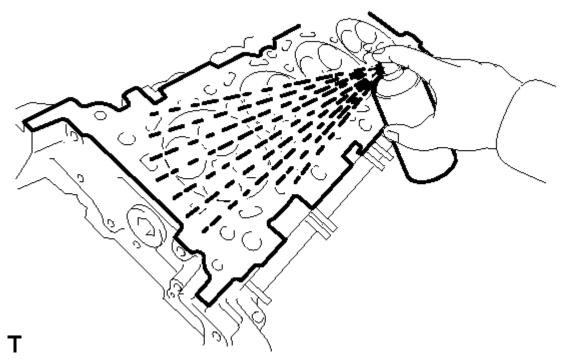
Checking Intake Ports, Exhaust Ports And Cylinder Surface For Cracks
